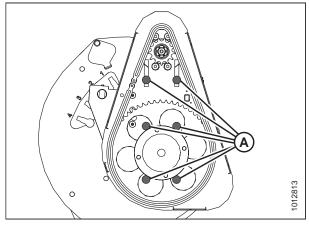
Single-Reel Drive Shown – Double Reel Similar
